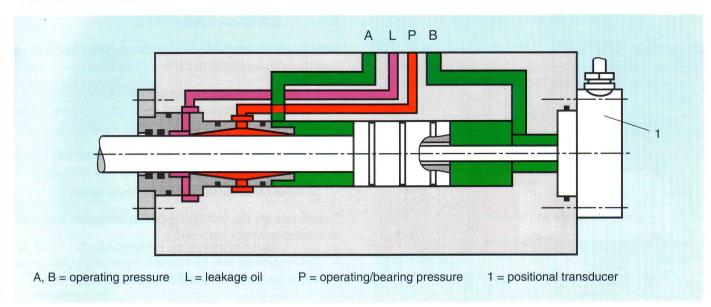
Schematic diagram of servo cylinder with hydrostatic tapered gap bearing supporting piston rod
